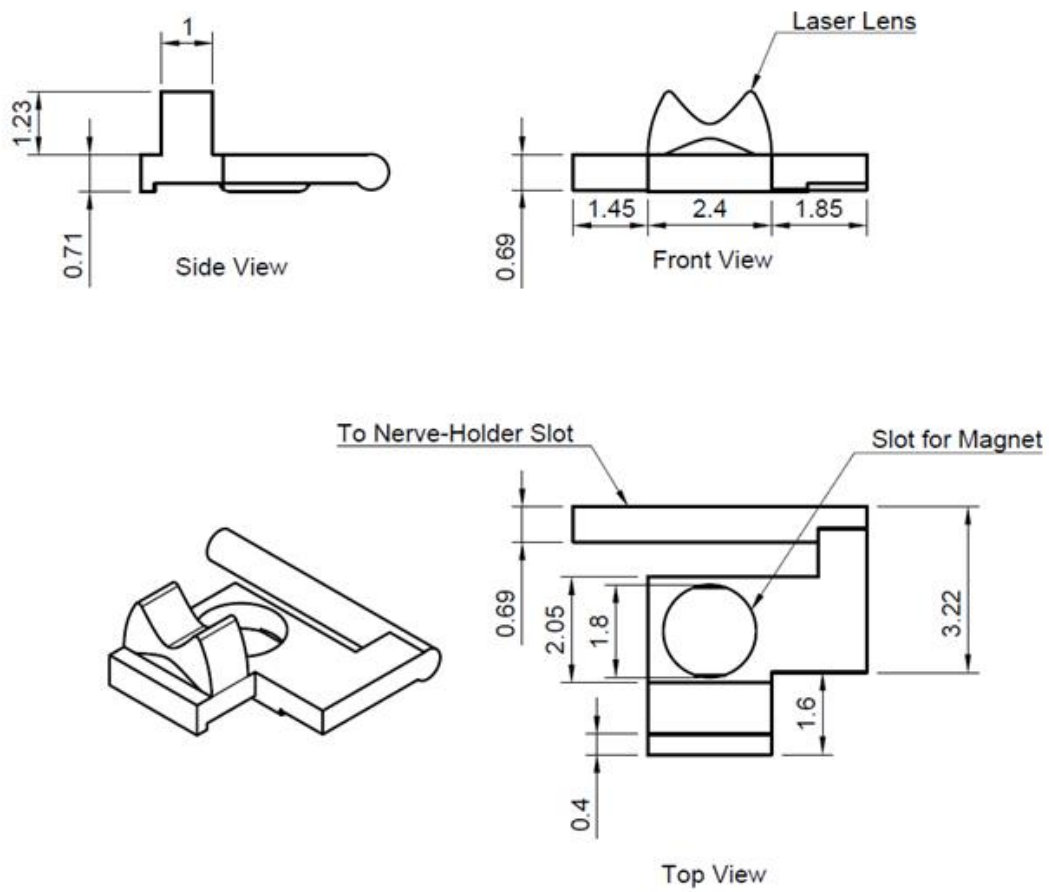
Design of the laser lens flap. All dimensions are in millimeters (mm).
